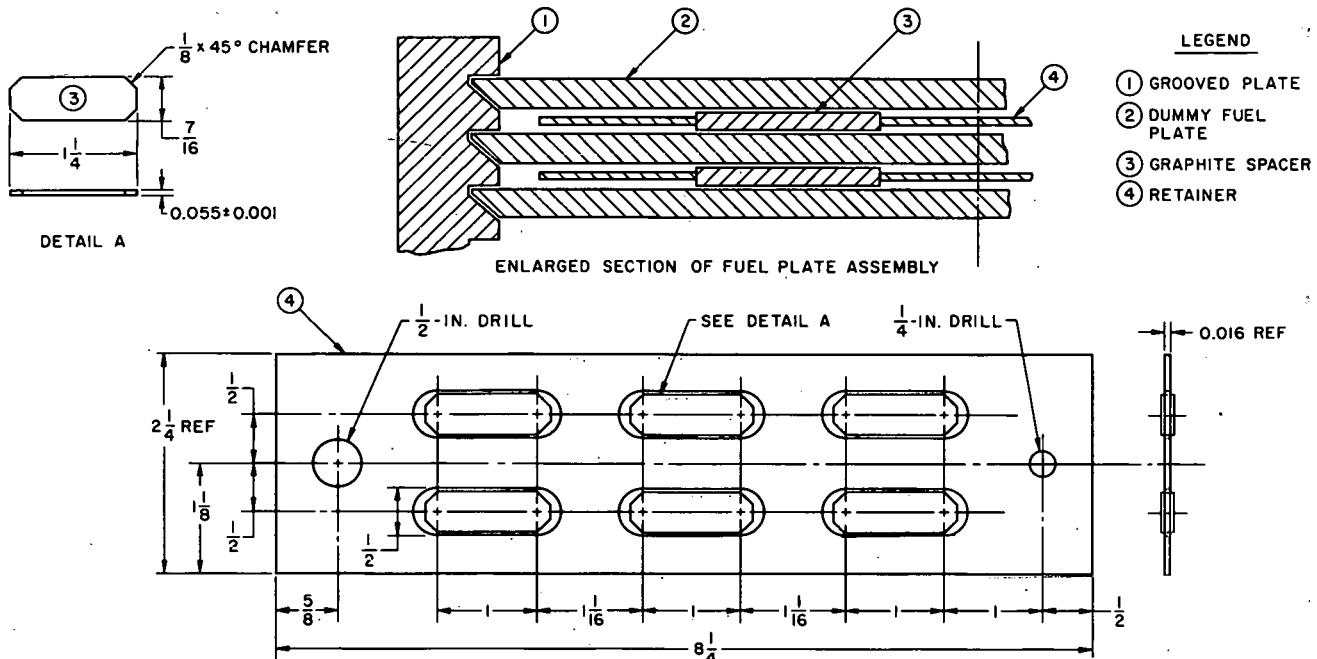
Spacers for Coolant Channel Support during Brazeing; All Dimensions in Inches
